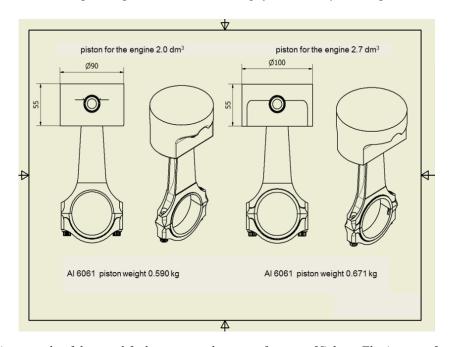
An example of the simplified geometric drawing of piston of Subaru Flat4 engine for Option 3
